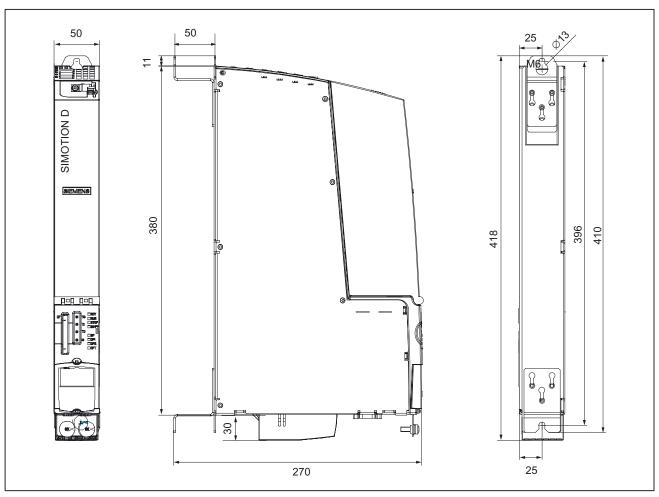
Dimension drawing of SIMOTION D425 and SIMOTION D435
